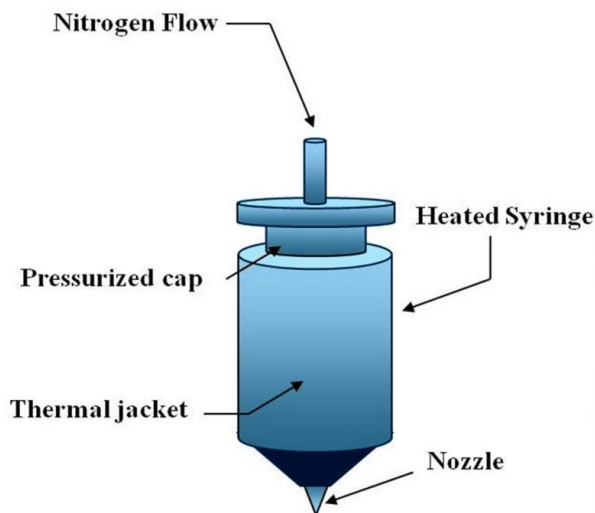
" Additive manufacturing technique: 3D fiber deposition and key elements.
